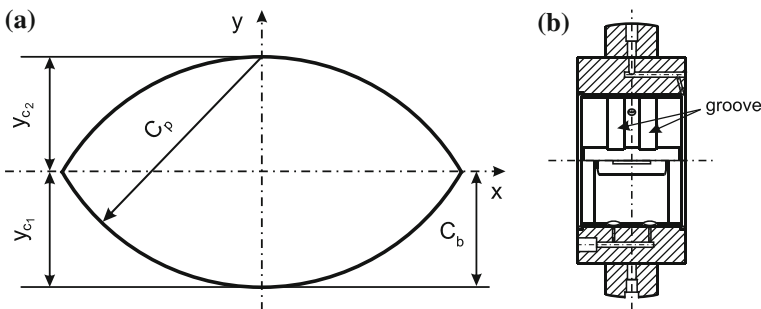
a Configuration of an elliptical oil-film journal bearing. b Section view of a real bearing
